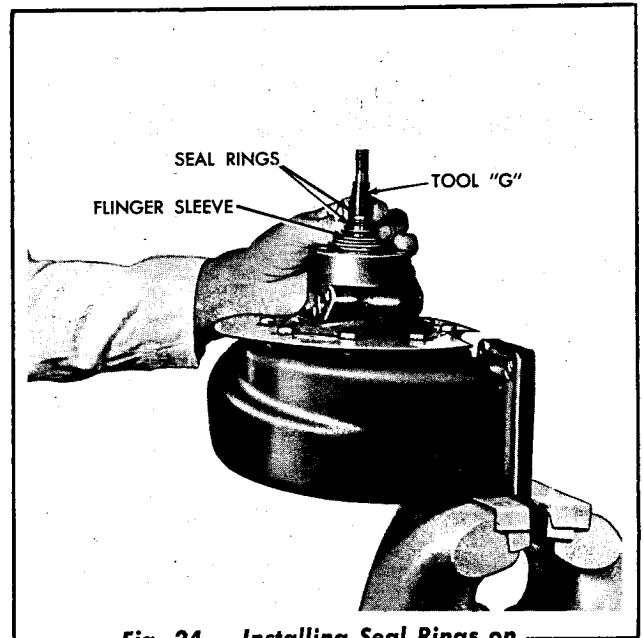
Installing Seal Rings on Flinger Sleeve
